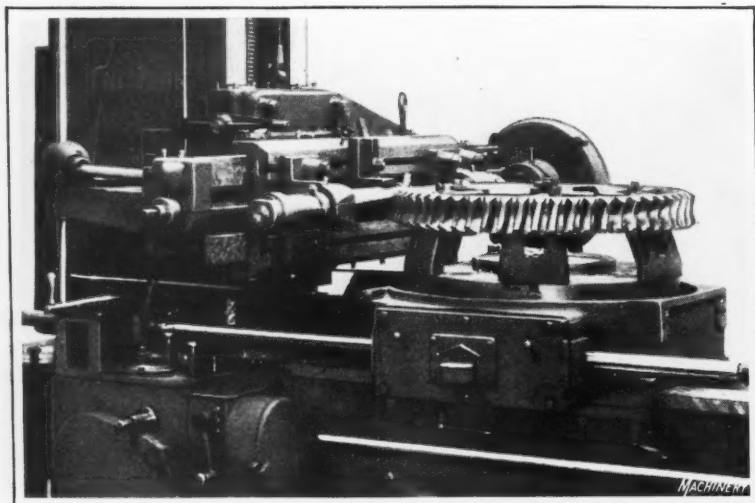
Another Example of Worm-gear Cutting by Means of a Fly Cutter
